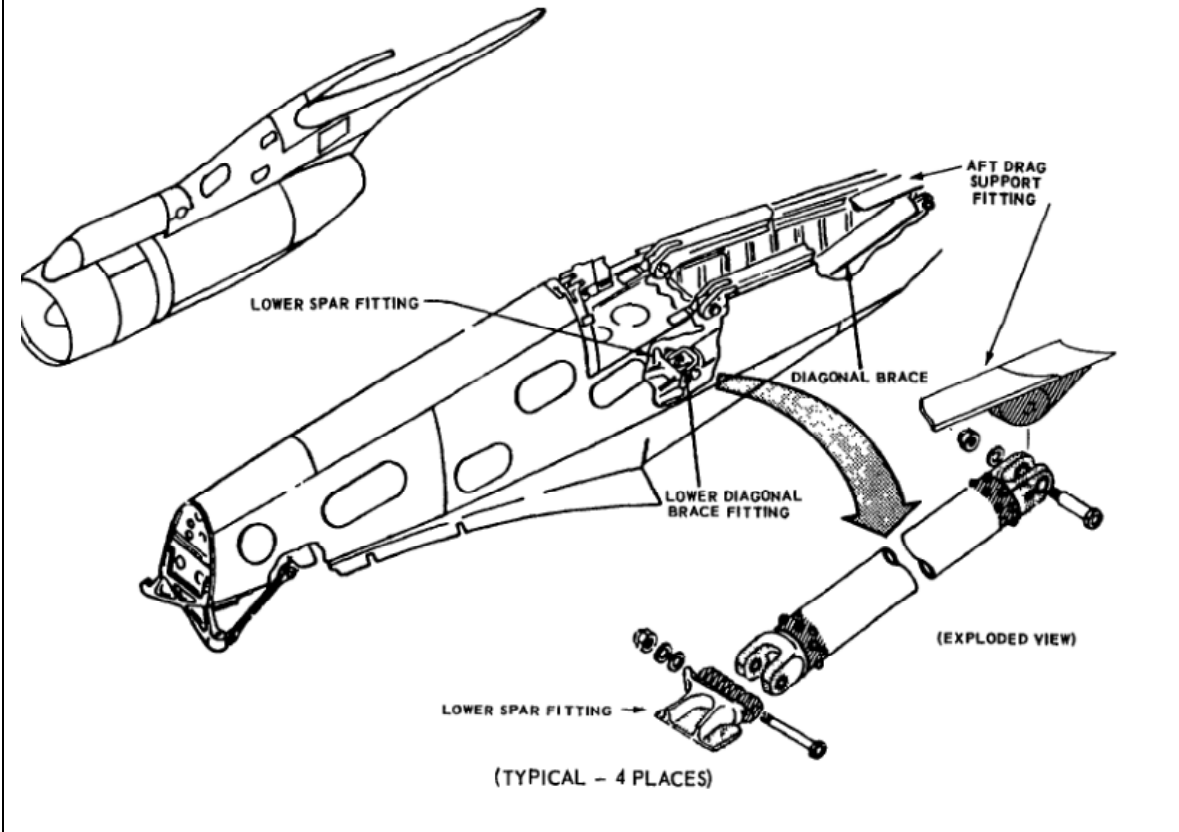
Lower spar fitting and diagonal brace attachments to wing aft drag fitting
